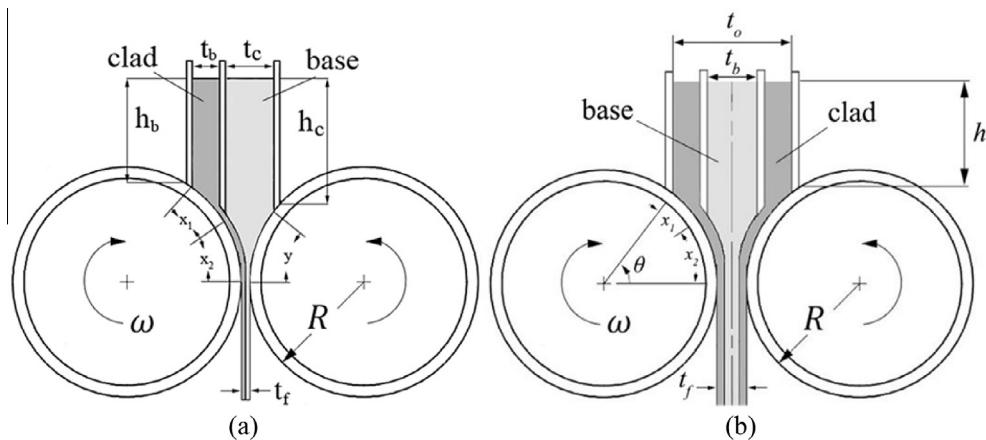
Twin-roll casting processes to fabricate a laminated sheet: (a) Type I and (b).
